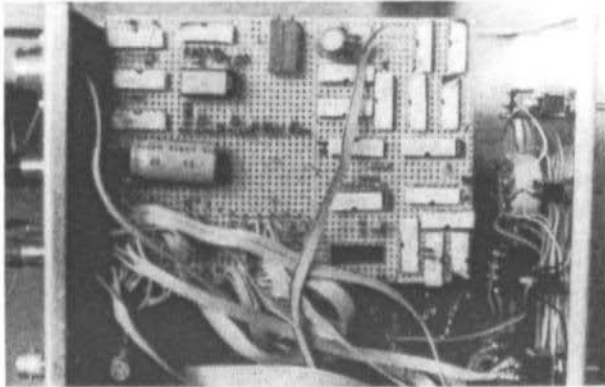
Perforated strip board and wiring of the control and indicating elements
